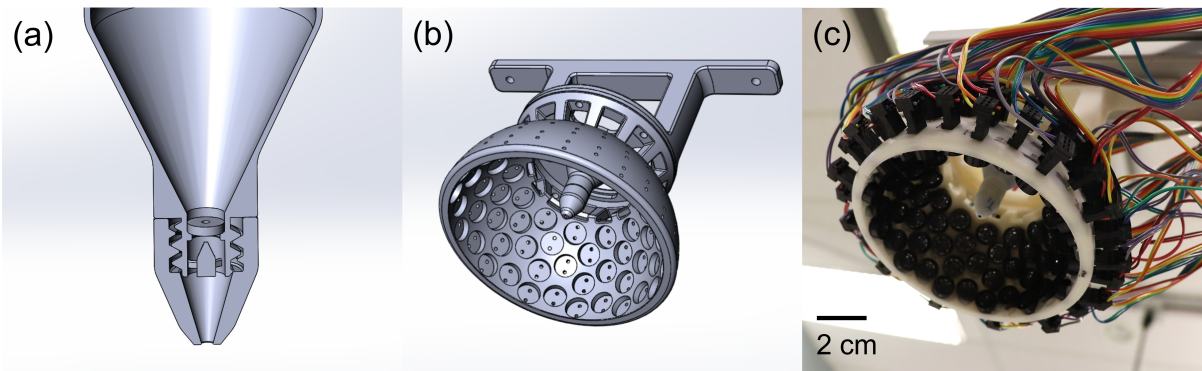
(a) Internal geometry of the hopper and powder feed mechanism. (b) Array frame, hopper and connecting frame assembly. (c) Assembled ultrasonic array attached to the hopper assembly.
